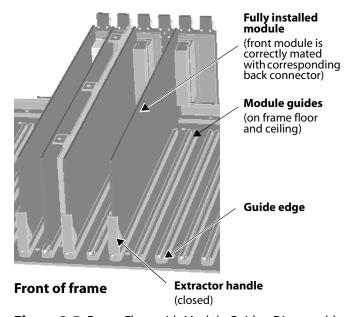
Frame Floor with Module Guides, Disassembled View
